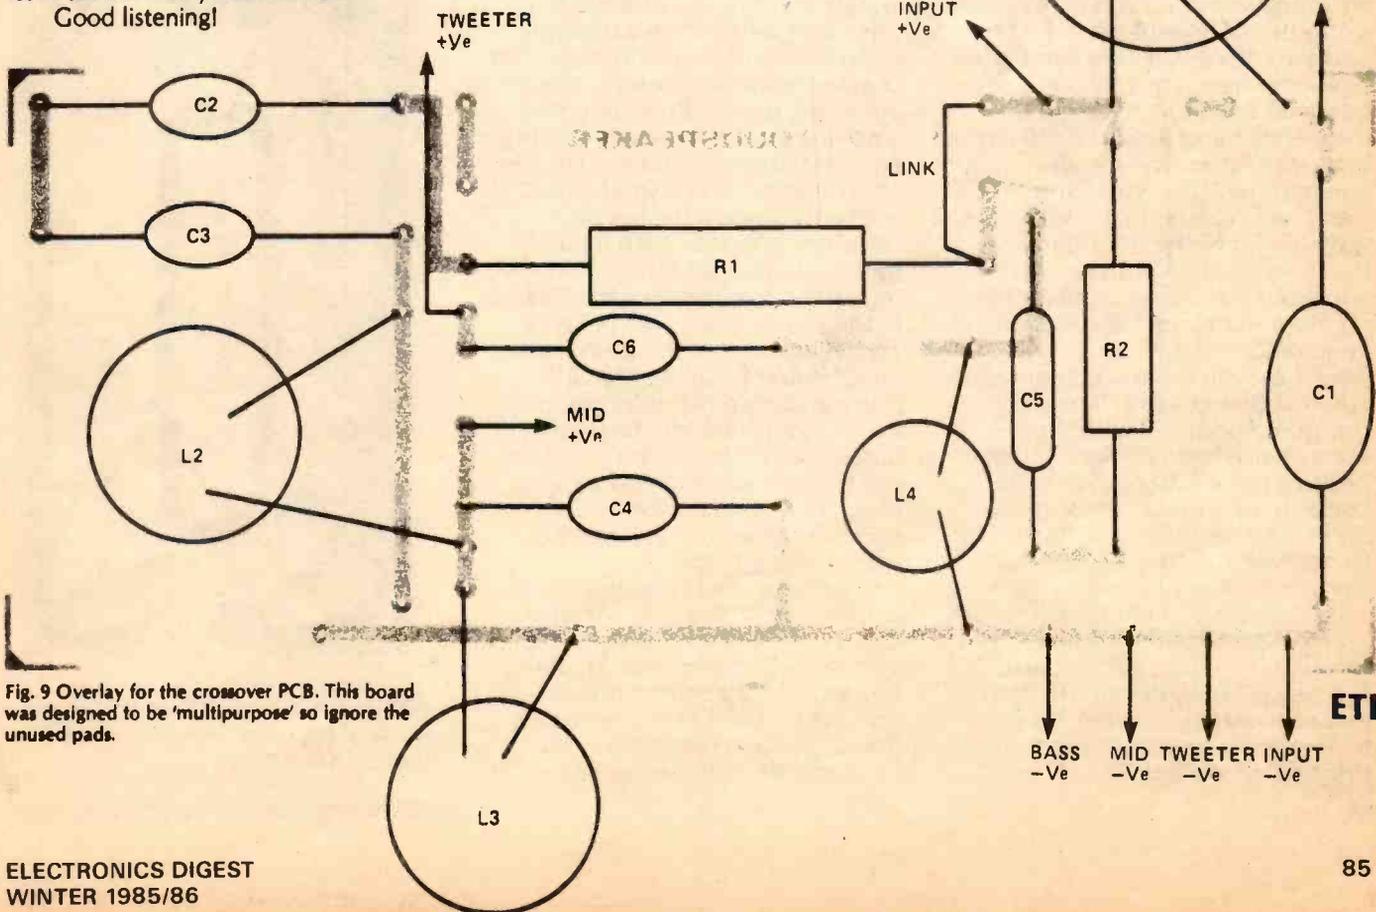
Overlay for the crossover PCB. This board was designed to be 'multipurpose' so ignore the unused pads.
